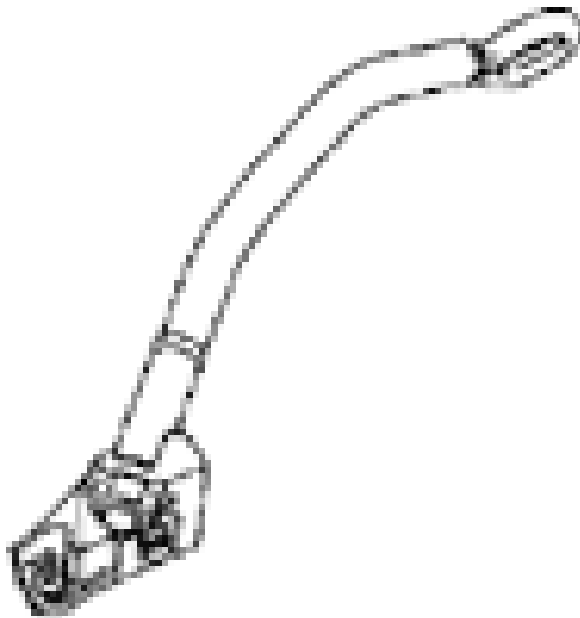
Removing Engine From Engine Stand Using Special Tools
